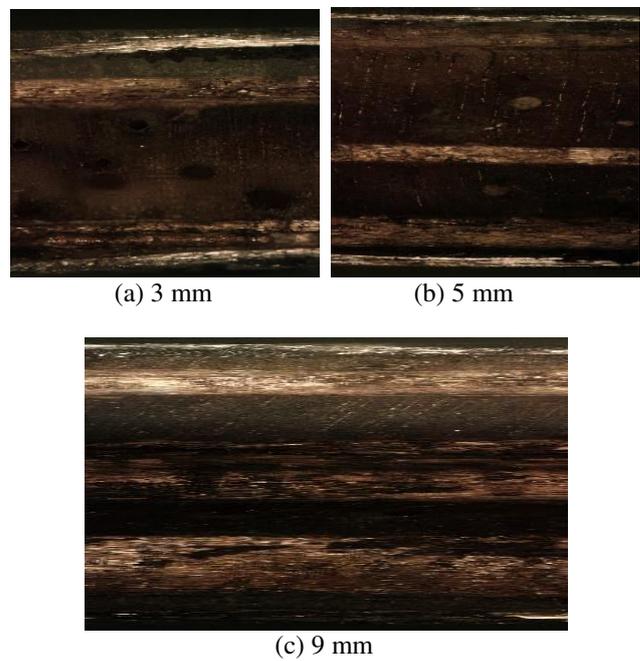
Capture image of plywood sandwich laminate composites with 3750 mm/min laser cut machine cutting speed parameters.
